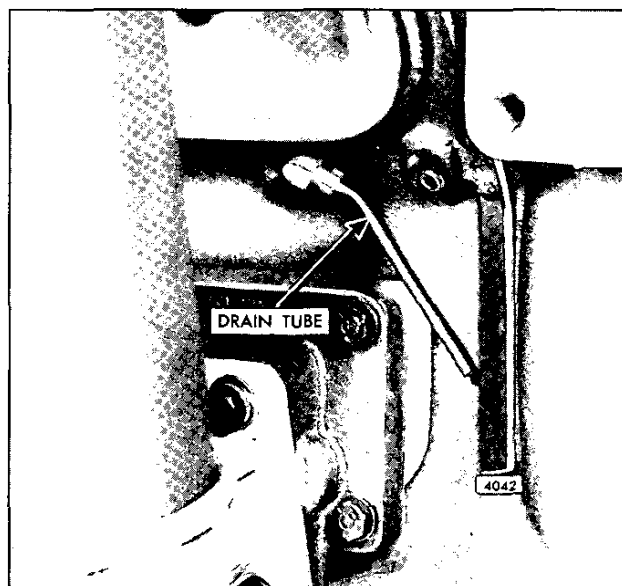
Air Box Drain Tube Mounting (6V Engine)
